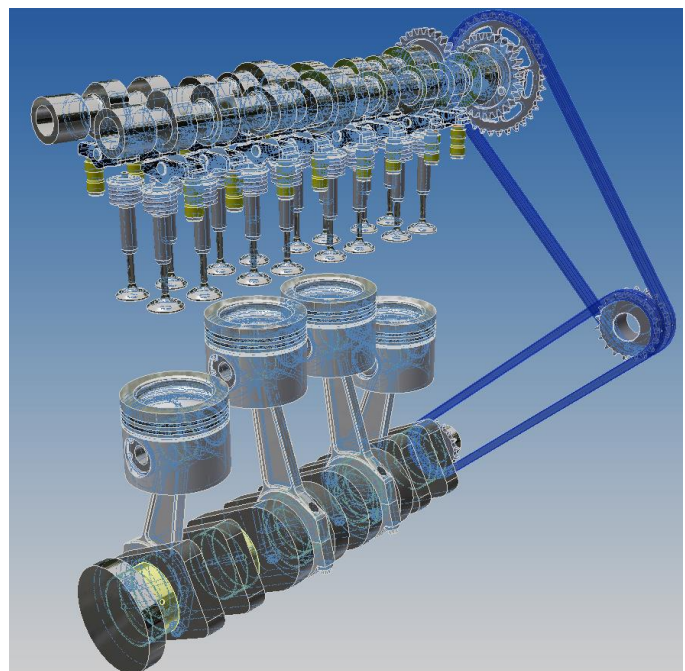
ENGINE WITHOUT ENGINE BLOCK AND CYLINDER HEAD
